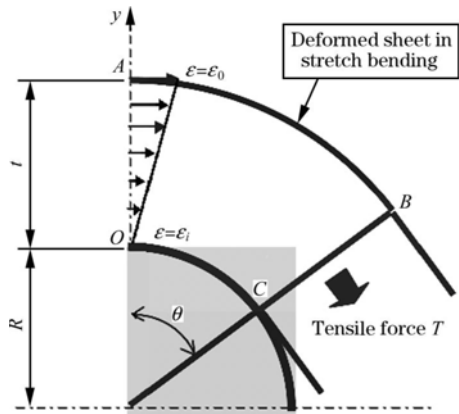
Schematic illustration of deformed sheet in stretch bending
